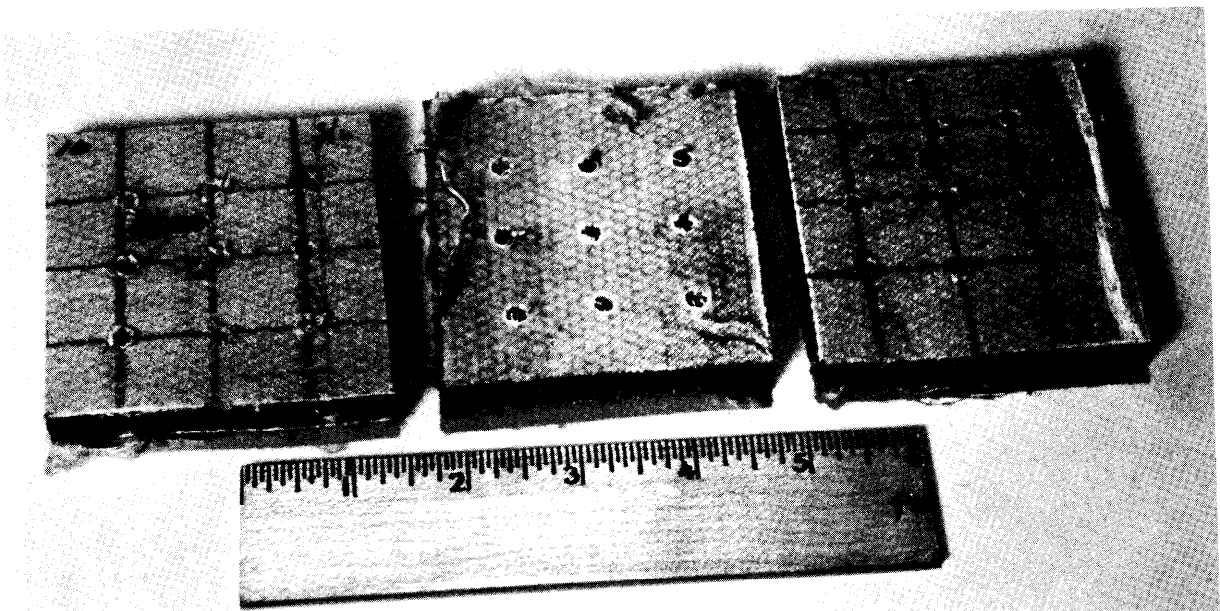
DRILL: .190 STANDARD DRILL
